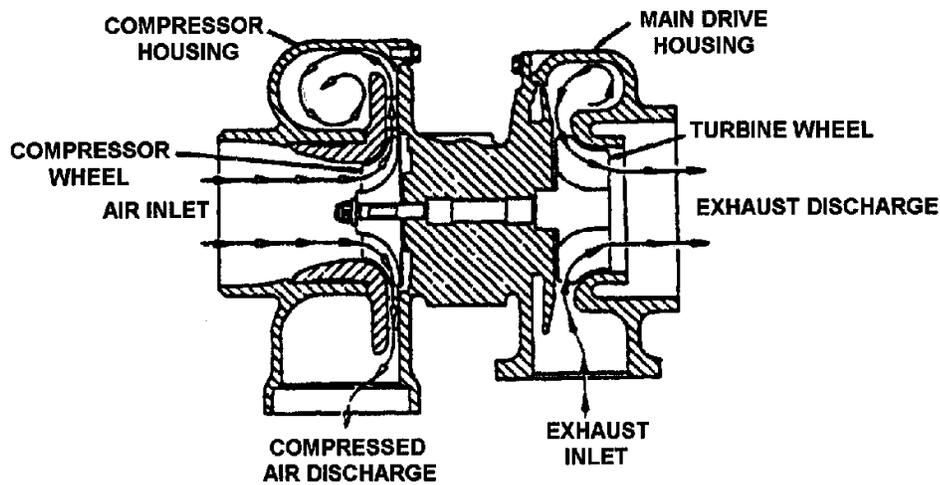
TURBOCHARGER SECTIONAL VIEW
